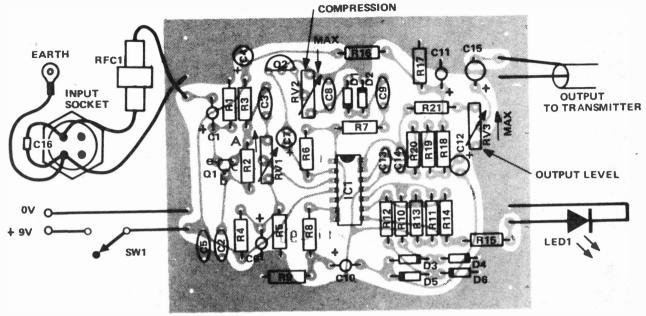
Component overlay of the speech processor. Note the RF choke and capacitor mounted between the PCB and input socket.
